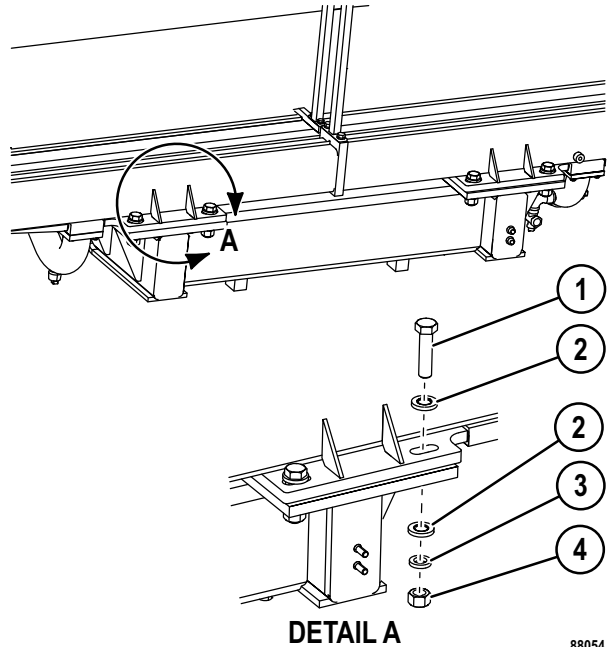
RADIATOR MOUNTING HARDWARE REMOVAL
